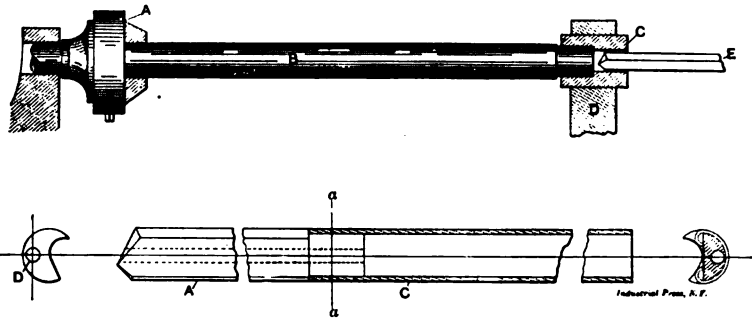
Arrangement for Starting the Deep Hole Drill, and Method of Fastening Shank to Drill
